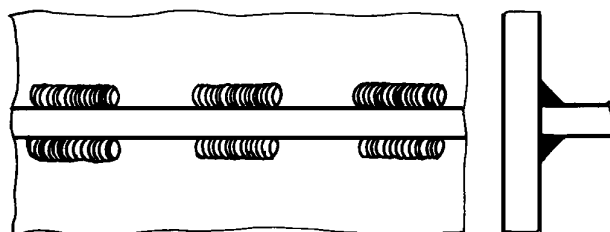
Chain intermittent weld / Kedjesvets
